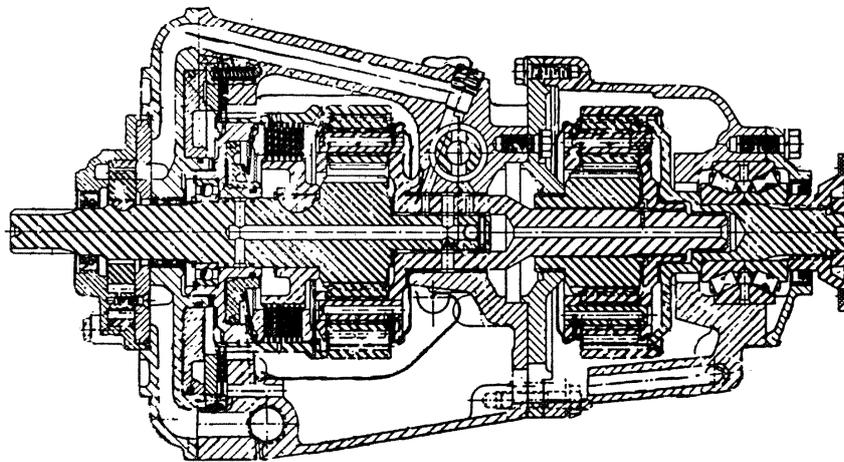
Hydraulically operated reverse gear, make Warner Gear
